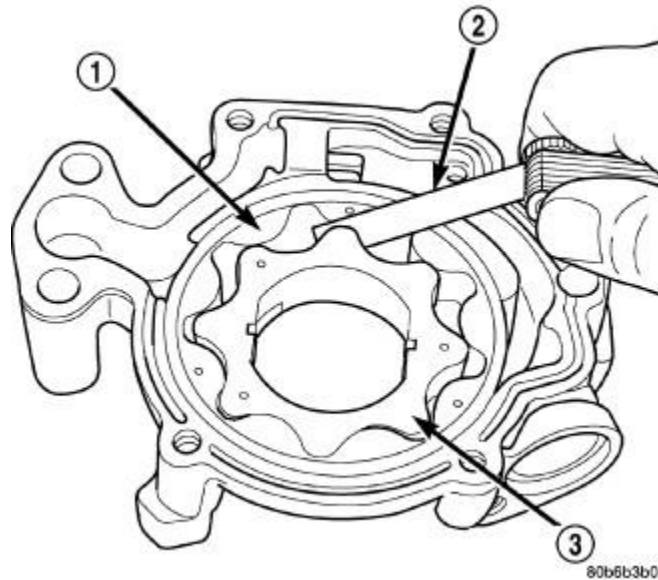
Measuring Clearance Between Inner & Outer Rotors
